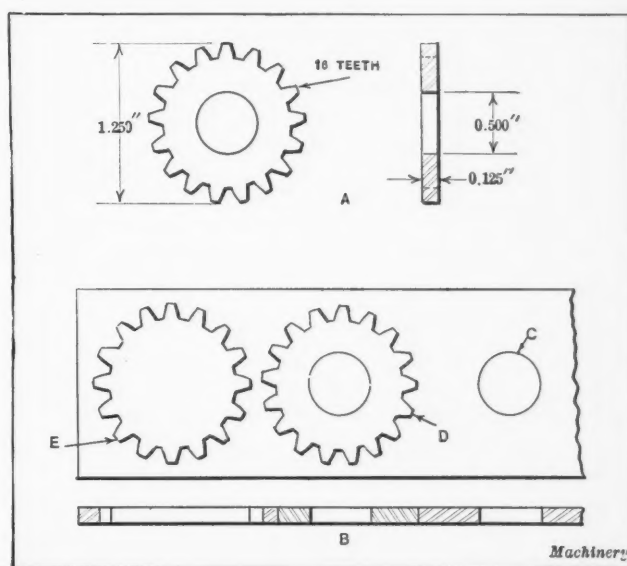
(A) Gear for which Dies were designed; (B) Appearance of the Stock as it is fed through the Blanking Die
